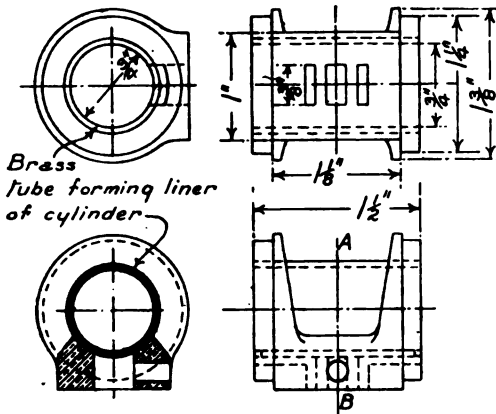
SHOWING CYLINDER CONSTRUCTION.
